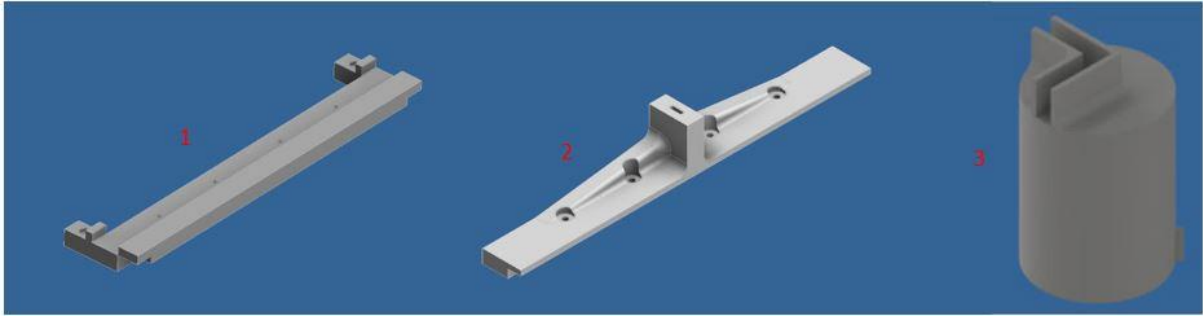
CAD drawings of the parts that were used to evaluate the X-axis motion.
